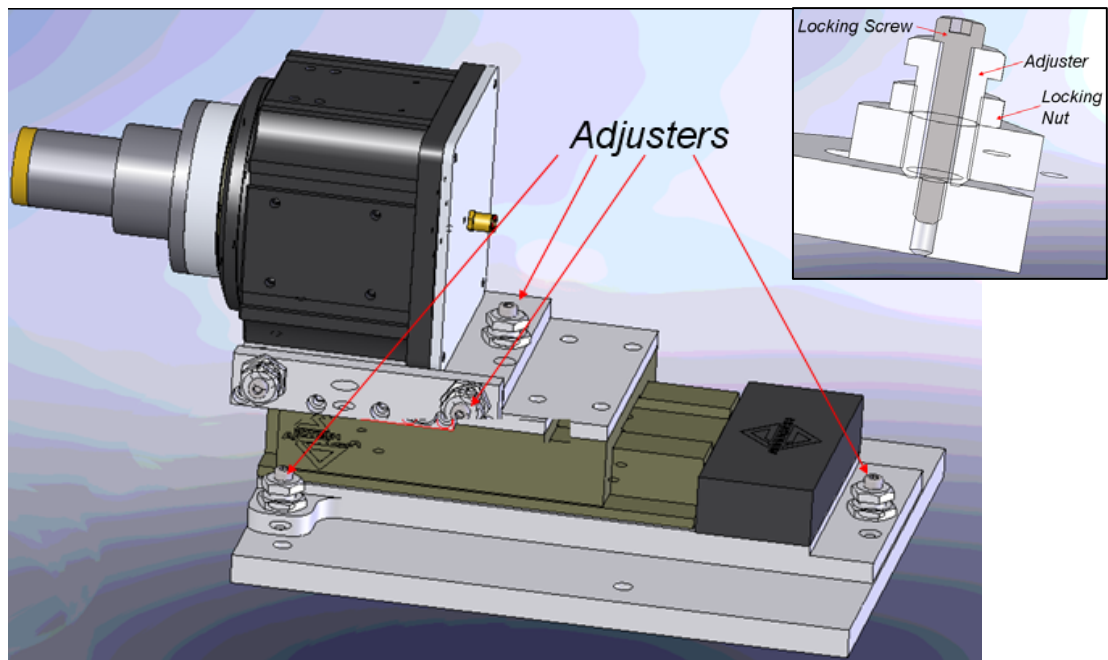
ϕ /Z sub-assembly with axis adjusters. Inset shows locking mechanism for adjuster bolts which are threaded for 0.794 mm/turn adjustment.
